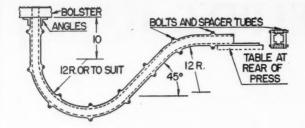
Drawing of a design for a chute which may be used to facilitate stacking "E" and "I" laminations.
